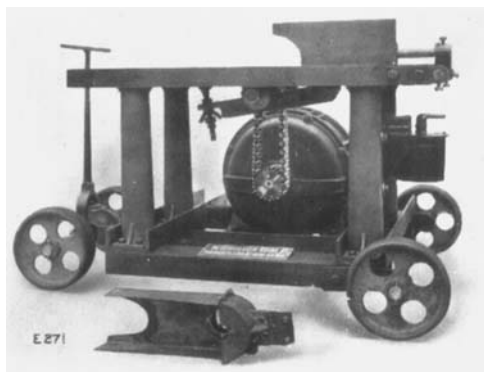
Portable Saw-Bench connected to Motor by Noiseless Drive Chain.
